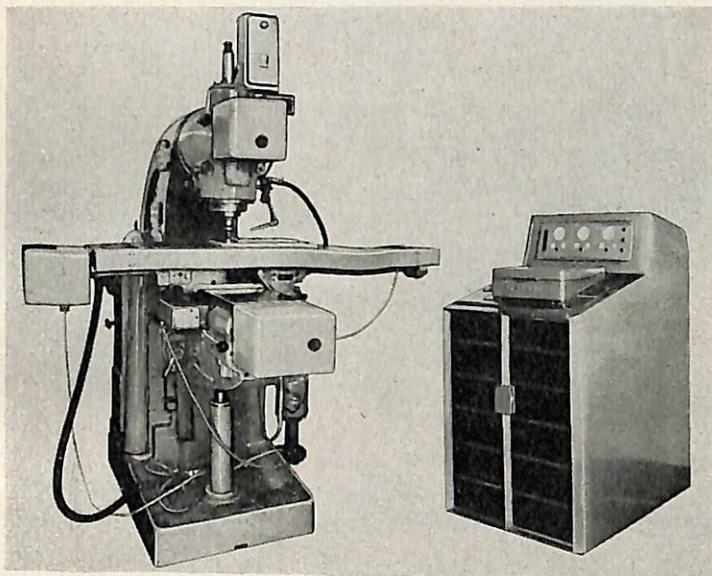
The C.V.A.-Kearny and Trecker Vertical Milling Machine fitted with Ferranti Three-dimensional Magnetic-tape Control
